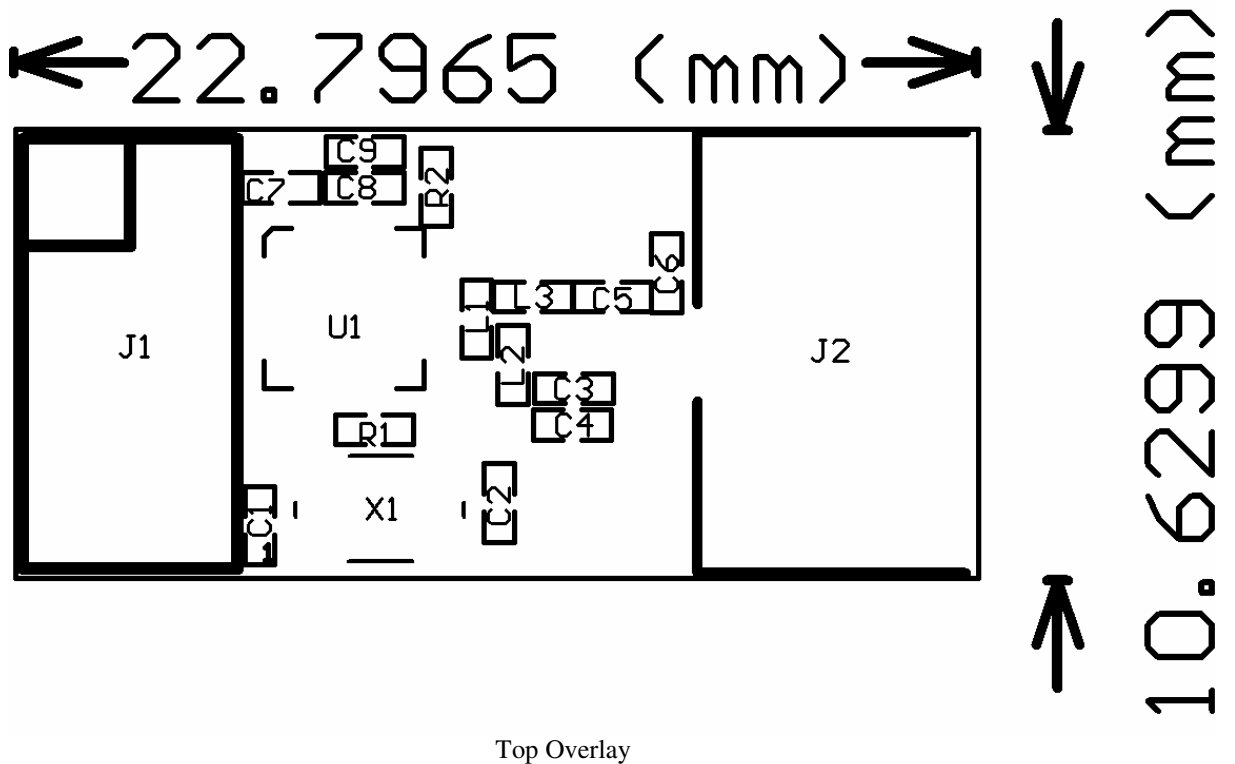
nRF24L01 RF layout with single ended connection to PCB antenna and 0603 size passive components
